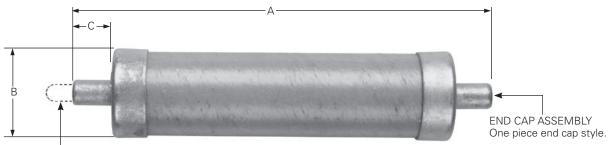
X-Limiter full-range current-limiting clip-style fuse cutaway shows details and dimensions. (See Table 4 for dimensions.)
